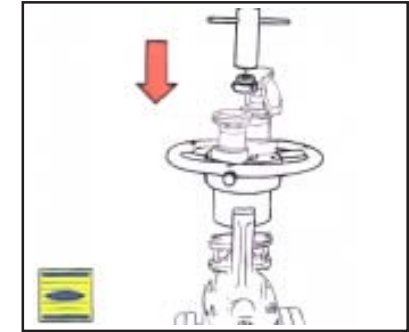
Secure interlock in place with security nut and tool supplied (thread lock recommended). This may again require removal & refitting CLS locks.
